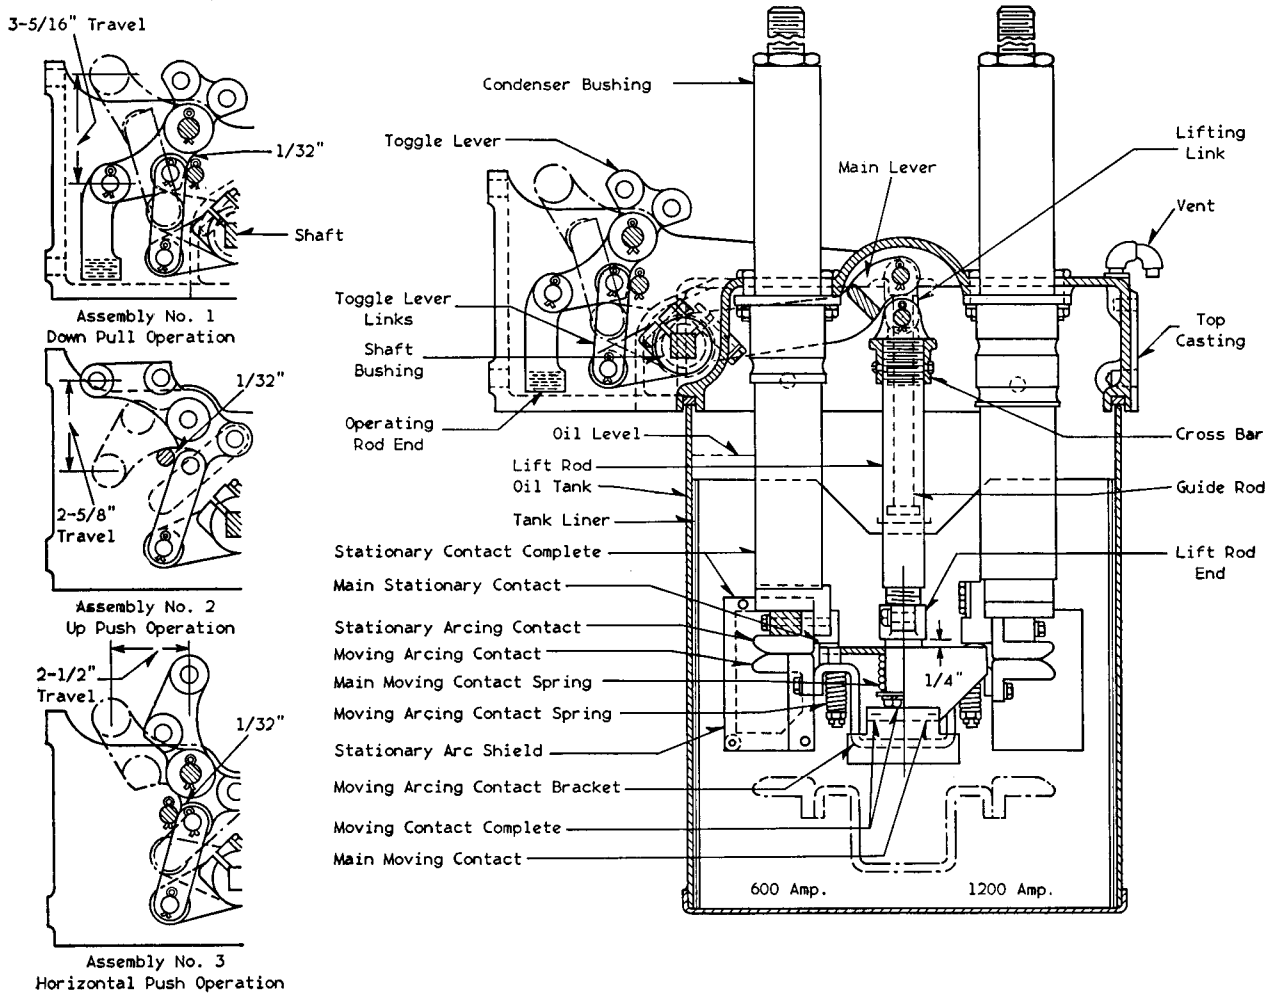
BREAKER POLE UNIT—SIDE VIEW—CROSS SECTION
